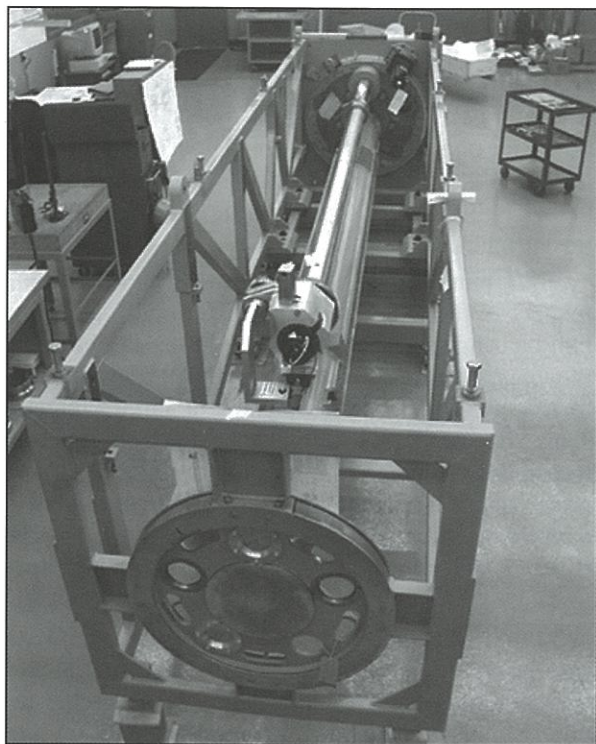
Magazine and Turret Tube mounted in Head Support Frame
